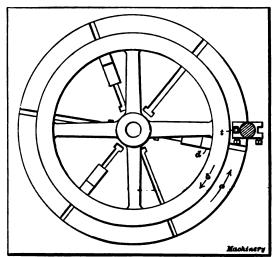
Plan View showing Flywheel Casting Chucked for Turning
